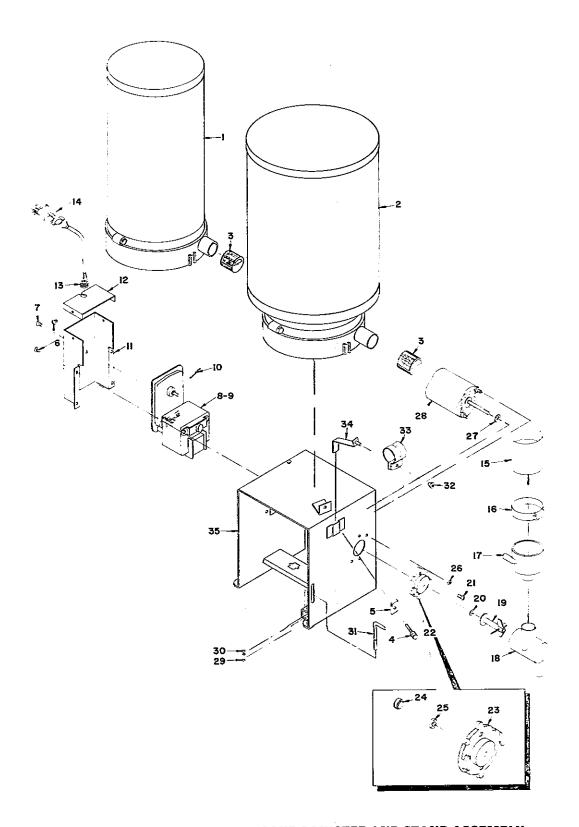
CHOCOLATE AND SOUP CANISTER AND STAND ASSEMBLY
